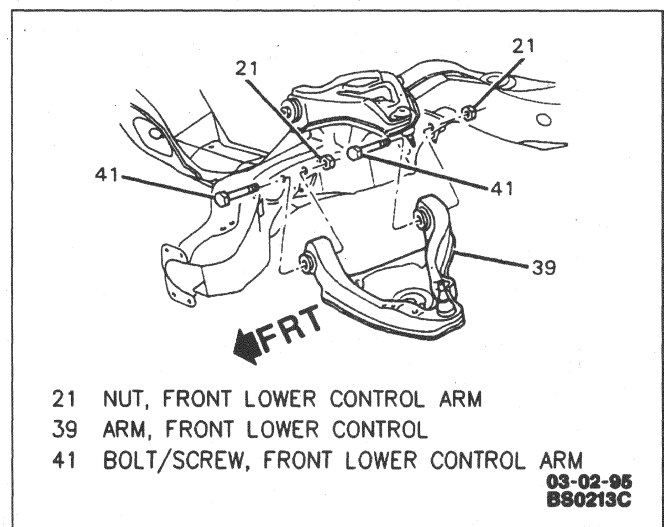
Installing Front Lower Control Arm Bolt/Screw
